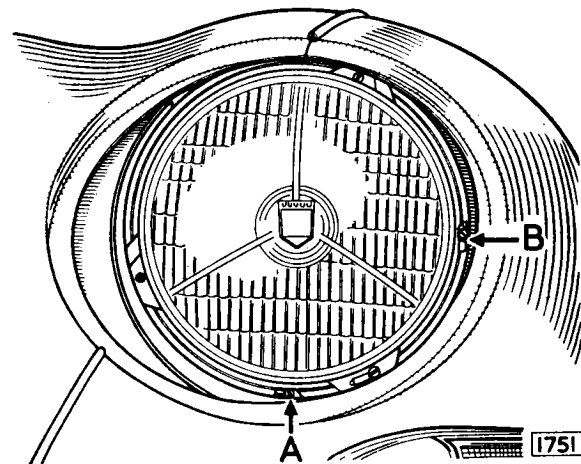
Adjustment of the screw 'A' will alter the headlamp beam in the vertical plane; adjustment of the screw 'B' will alter the beam in the horizontal plane.
